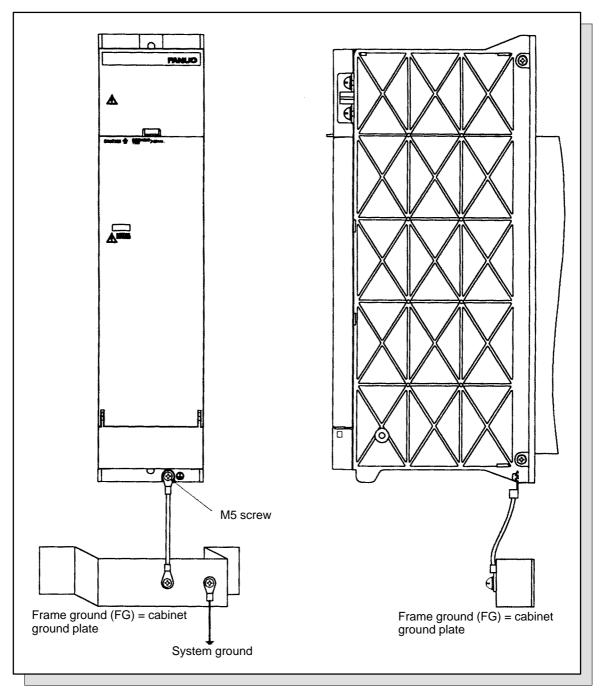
(o) Ground Cable Connection (PSMC-18HV, 30HV)
